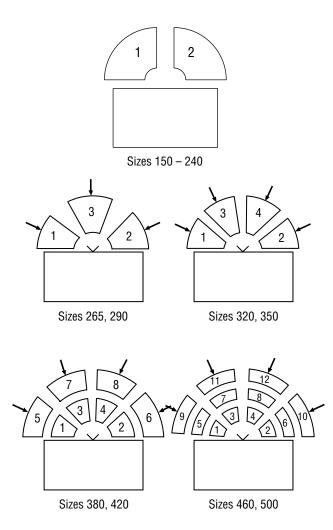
1. Assembly sequence. The heat exchanger should be freely accessible from all sides.
